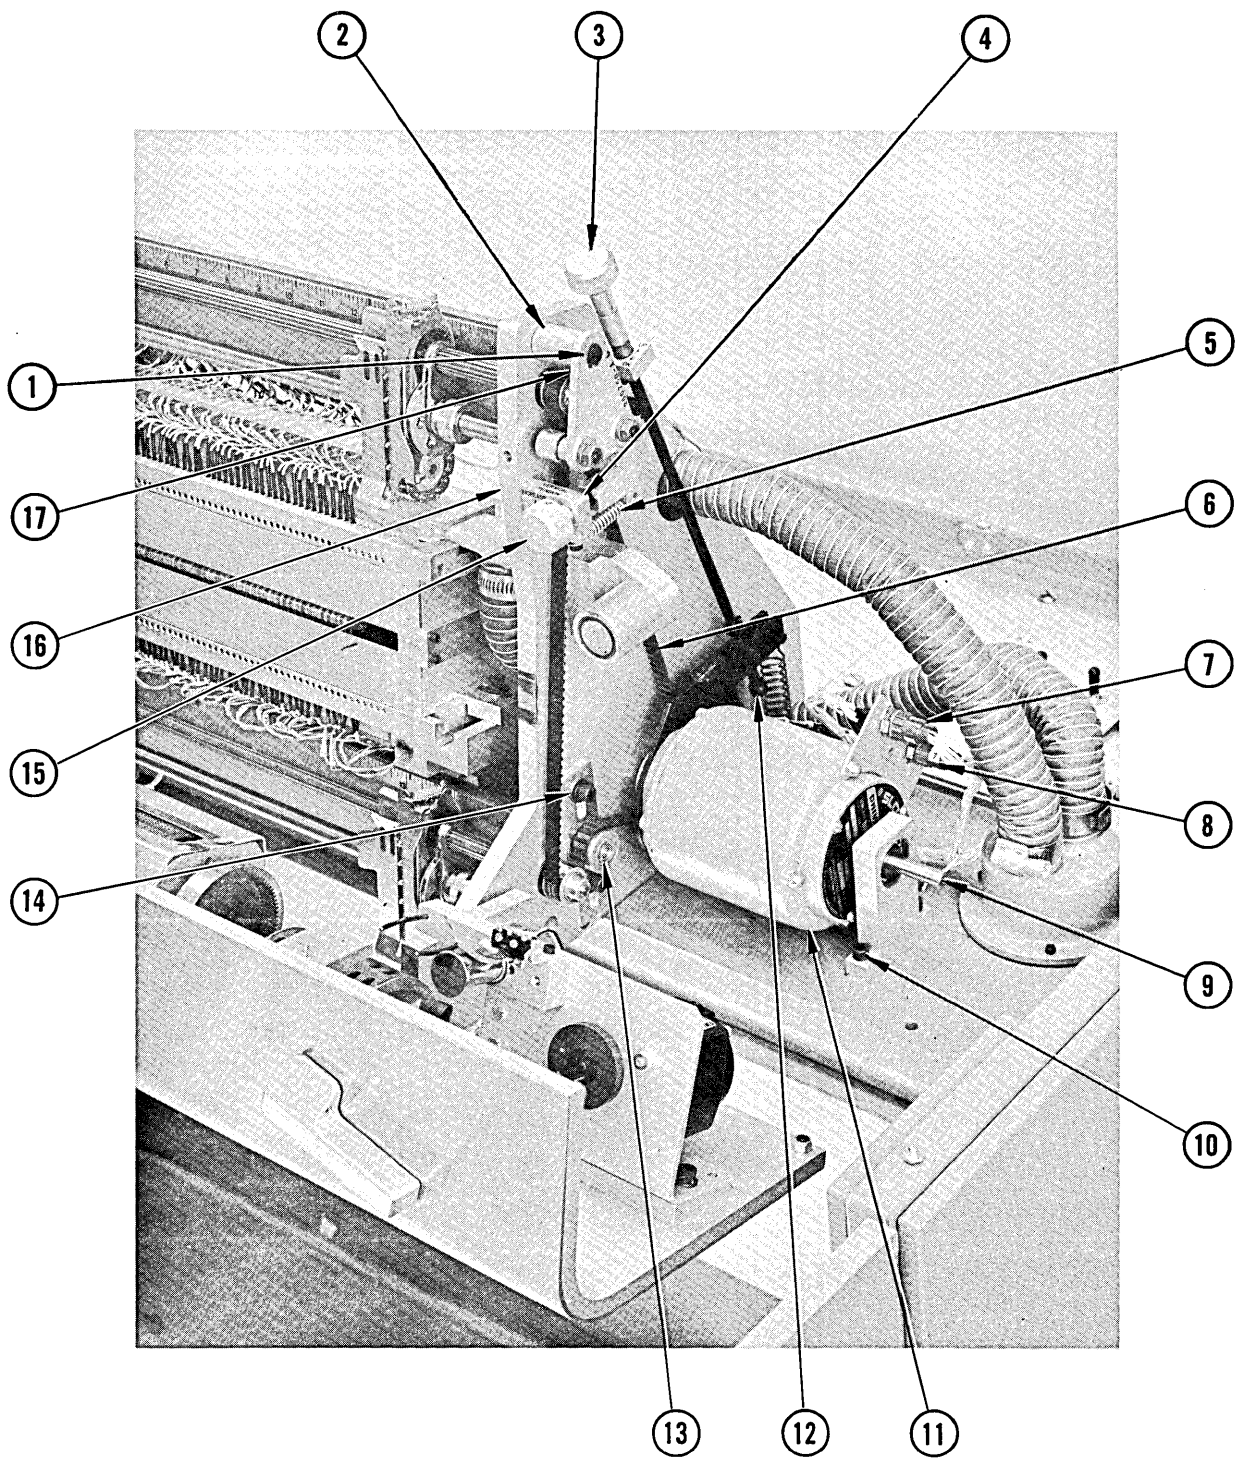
Paper-Feed Assembly, Right End (Serial Numbers P1 thru P21)
